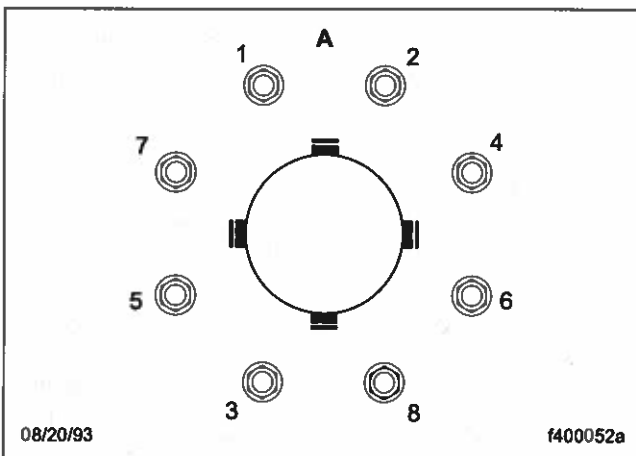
, Tightening Pattern, 8-Hole Wheels
